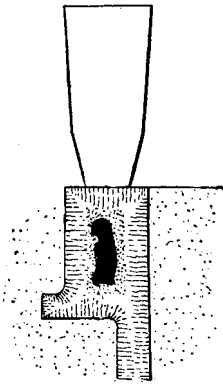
A BAD "DRAW" IN THICK METAL.
